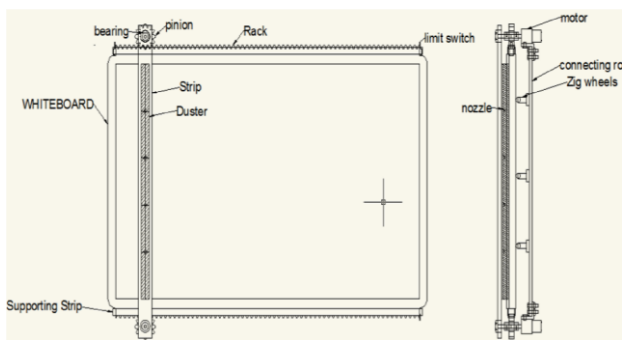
Whiteboard cleaning arrangement with rack and pinion mechanism.
